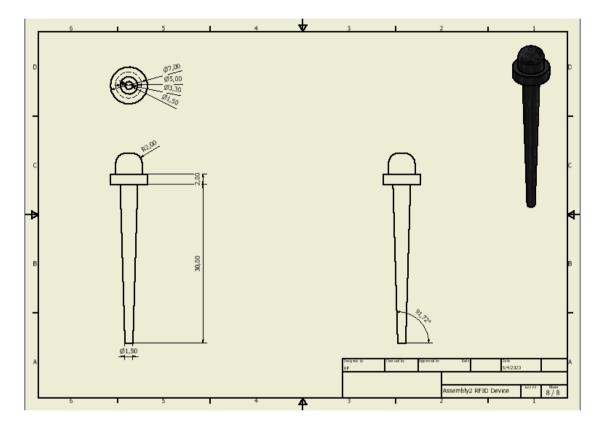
Orthographic Projection of the RFID Device button part with its full dimensions.
